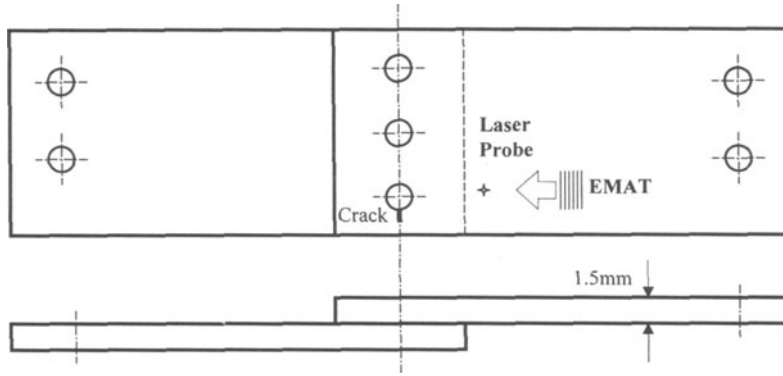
Configuration for experimental detection of fatigue cracks in a riveted thin plate-structure.
